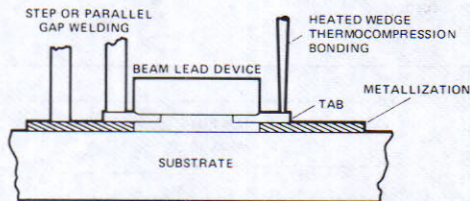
The Bonding of the Beam Lead Device is Achieved Using Either a Heated Wedge (Thermocompression Bonding) or Parallel Gap (Welding) Technique.
